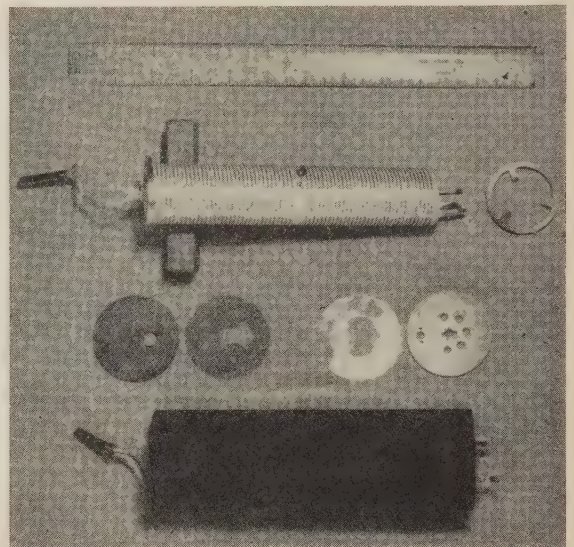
UNITS COMPOSING INNER CYLINDER ASSEMBLY
